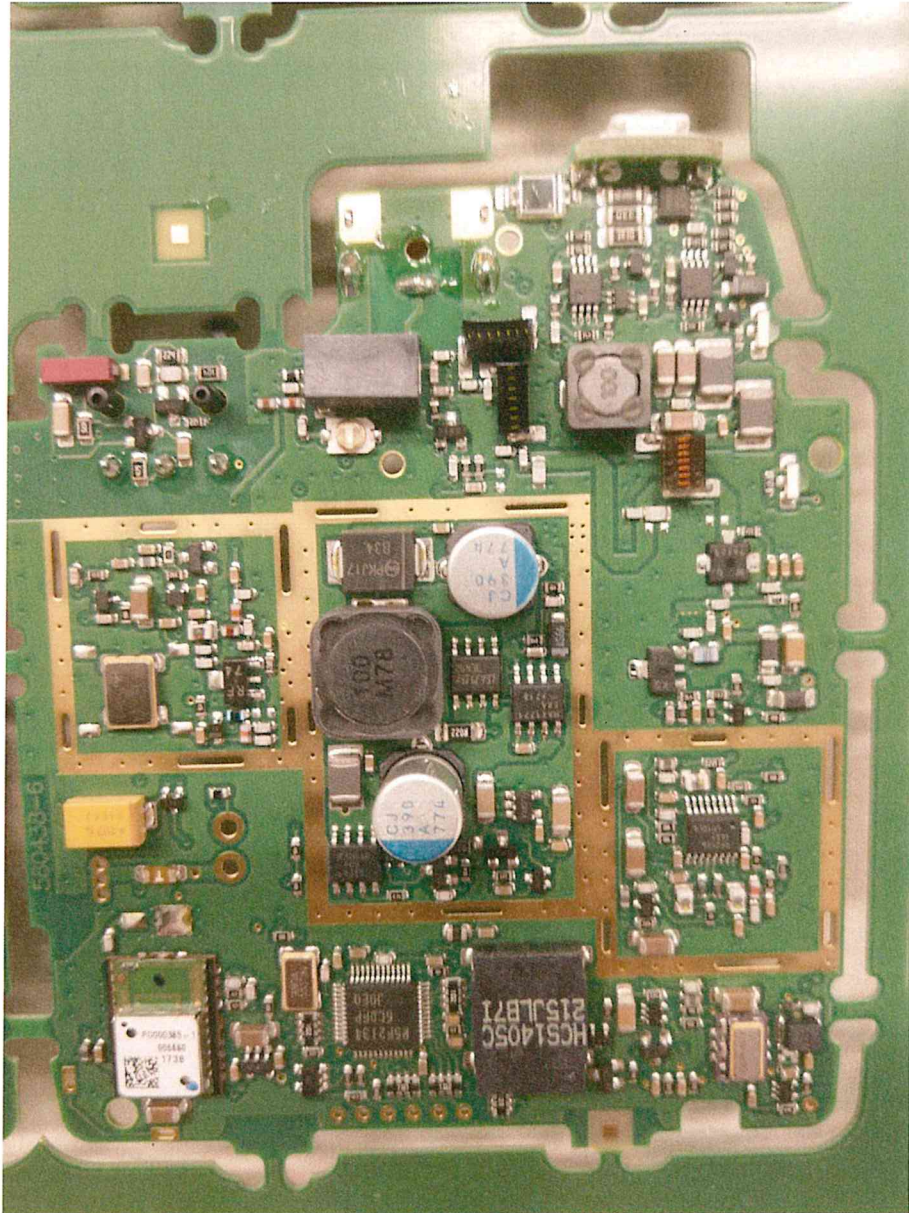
PCB Top view (in panelised form in production) before Shields fitting
